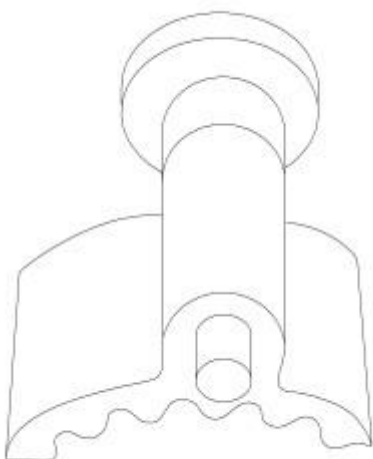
Crankshaft Front Seal Installer 9918
